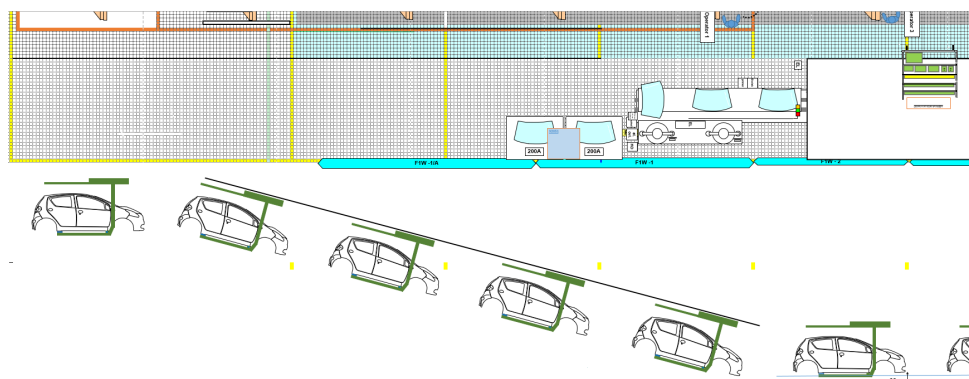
General layout of the Assembly line for degreasing workplace from side view.[62]
